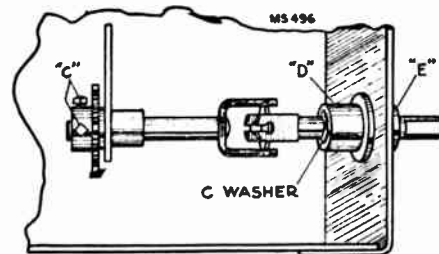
The late production range switch coupling shaft of the RCA 612V series.
